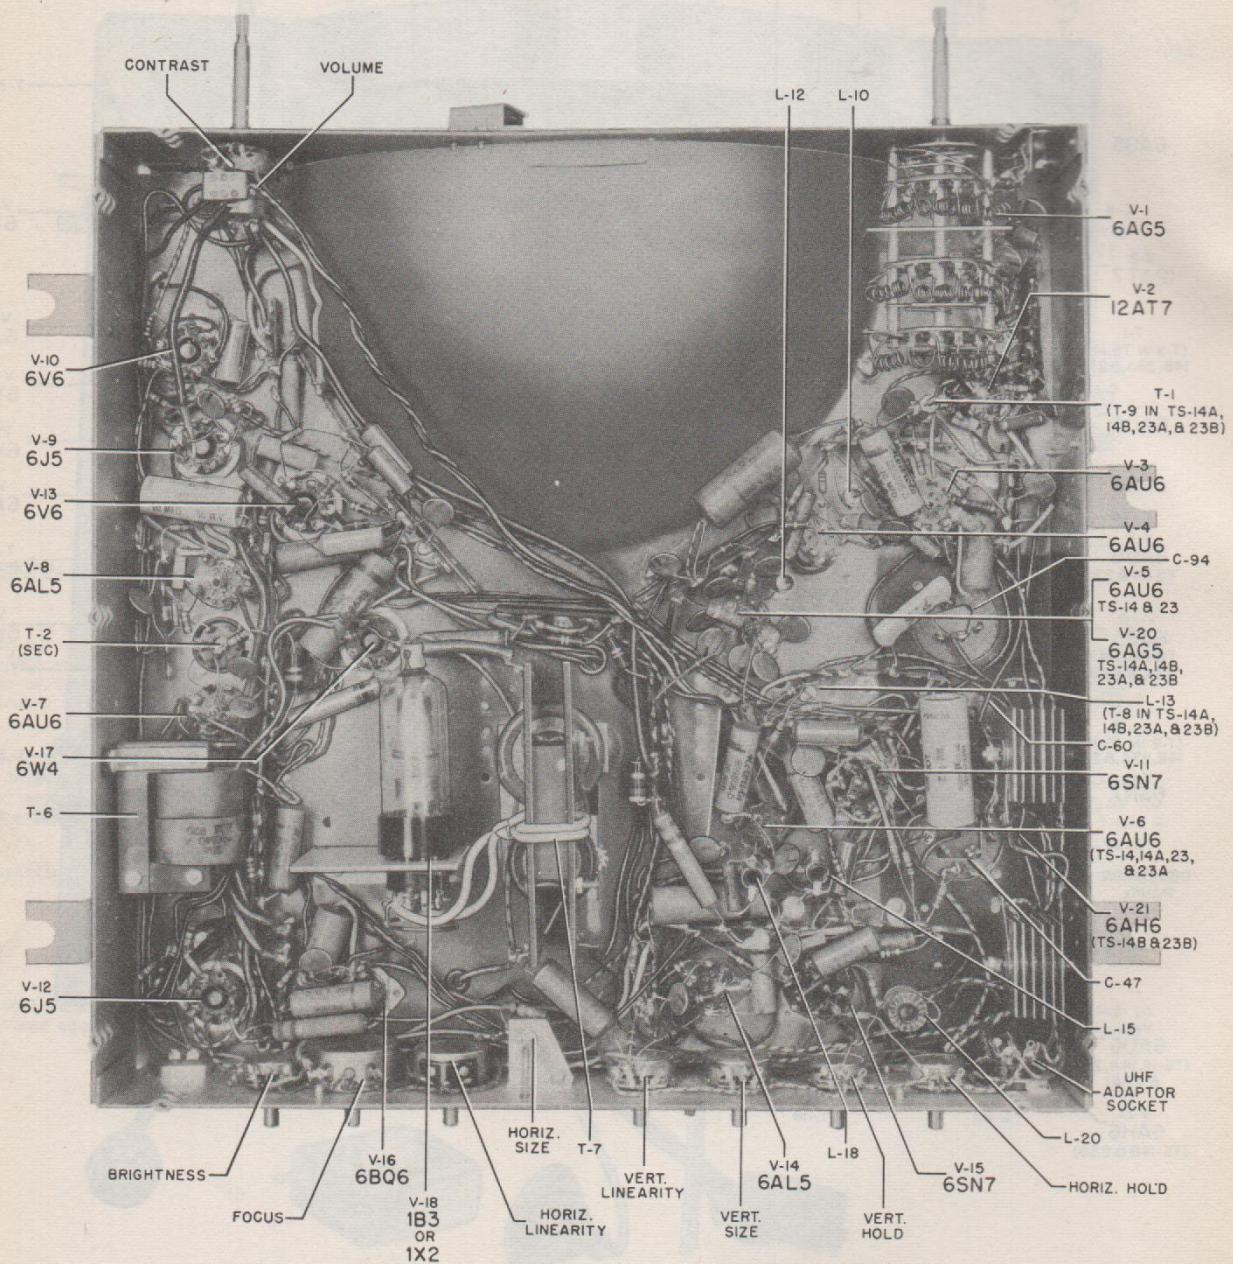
TS-14, TS-14A & TS-14B CHASSIS BOTTOM VIEW
